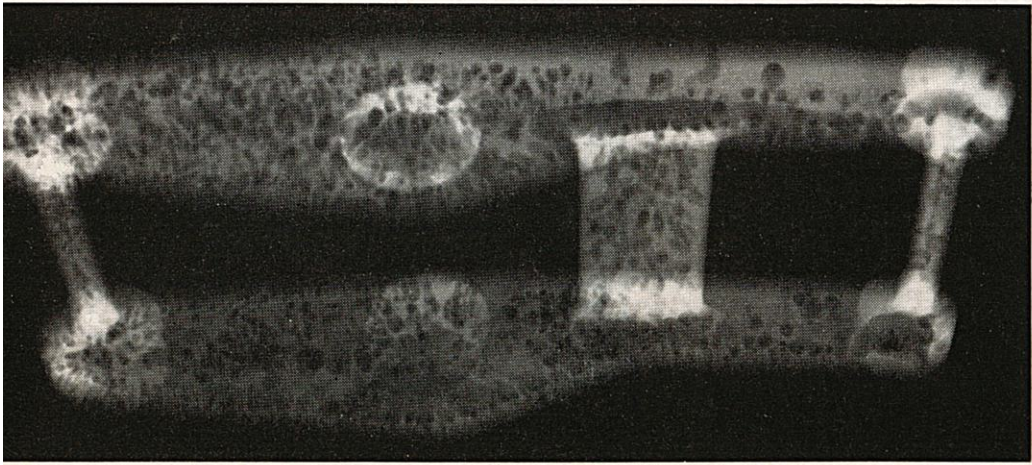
Right: Radiograph of a steel hanger casting showing gas holes. Average thickness 1/2 in., iridium 192, 9.5 Ci h, source - to - film distance (SFD) 24 in., Gevert D4 film.
